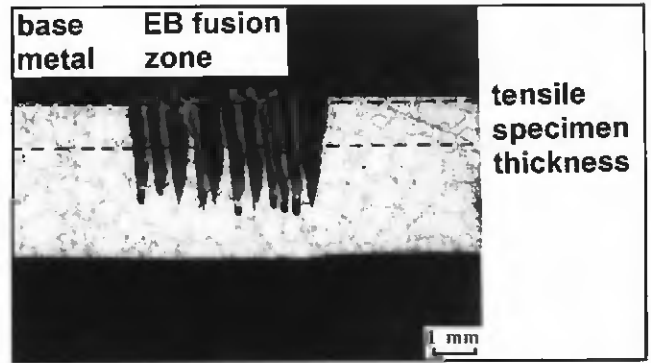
Optical micrograph illustrating a cross-sectional view that reveals the EB penetration and the region from which the tensile specimens were manufactured.
